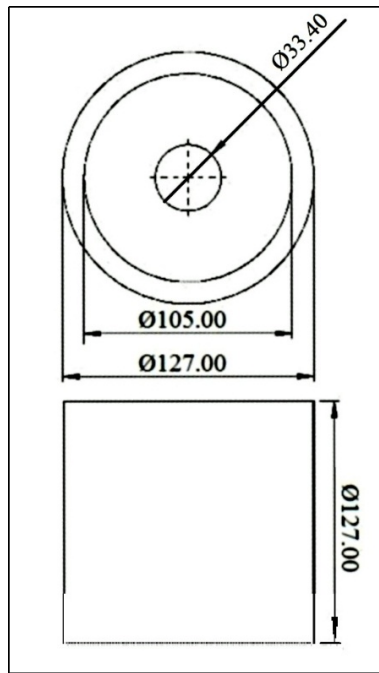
(a). Design & dimensions of roller, (unit: mm)
